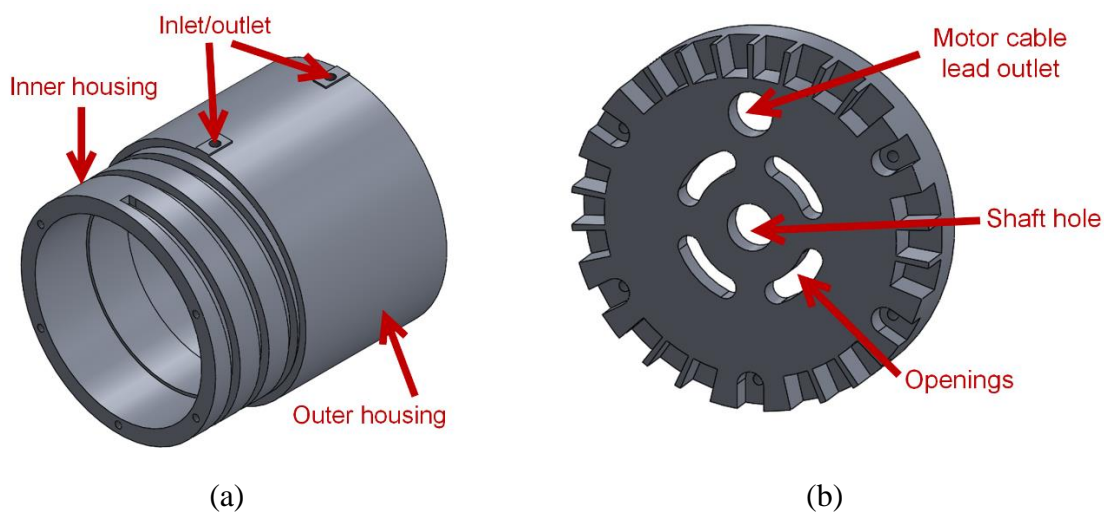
DLCW 6/4 FSPM machine housing (a) Water jacket (b) End cap.
